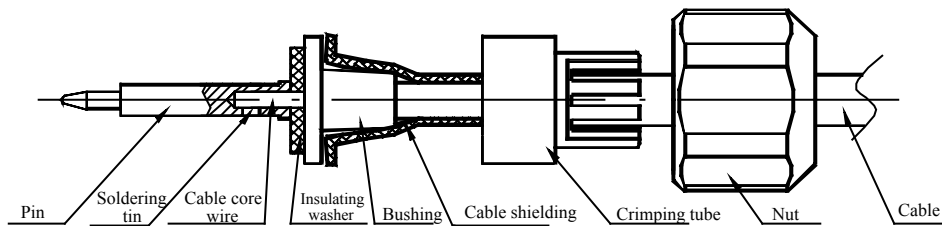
Schematic Diagram of Soldering the Core Wire with the Pin
